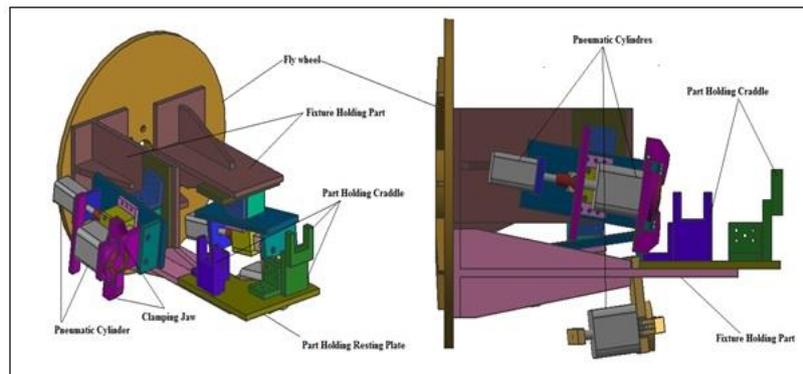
Head stock Flywheel Part Holding Fixture
